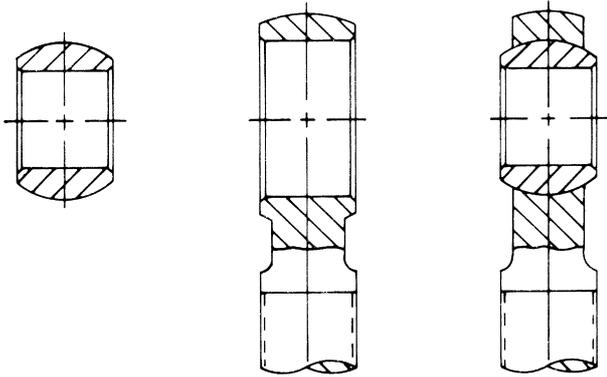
2- PIECE, SWAGE-COINED ROD END
